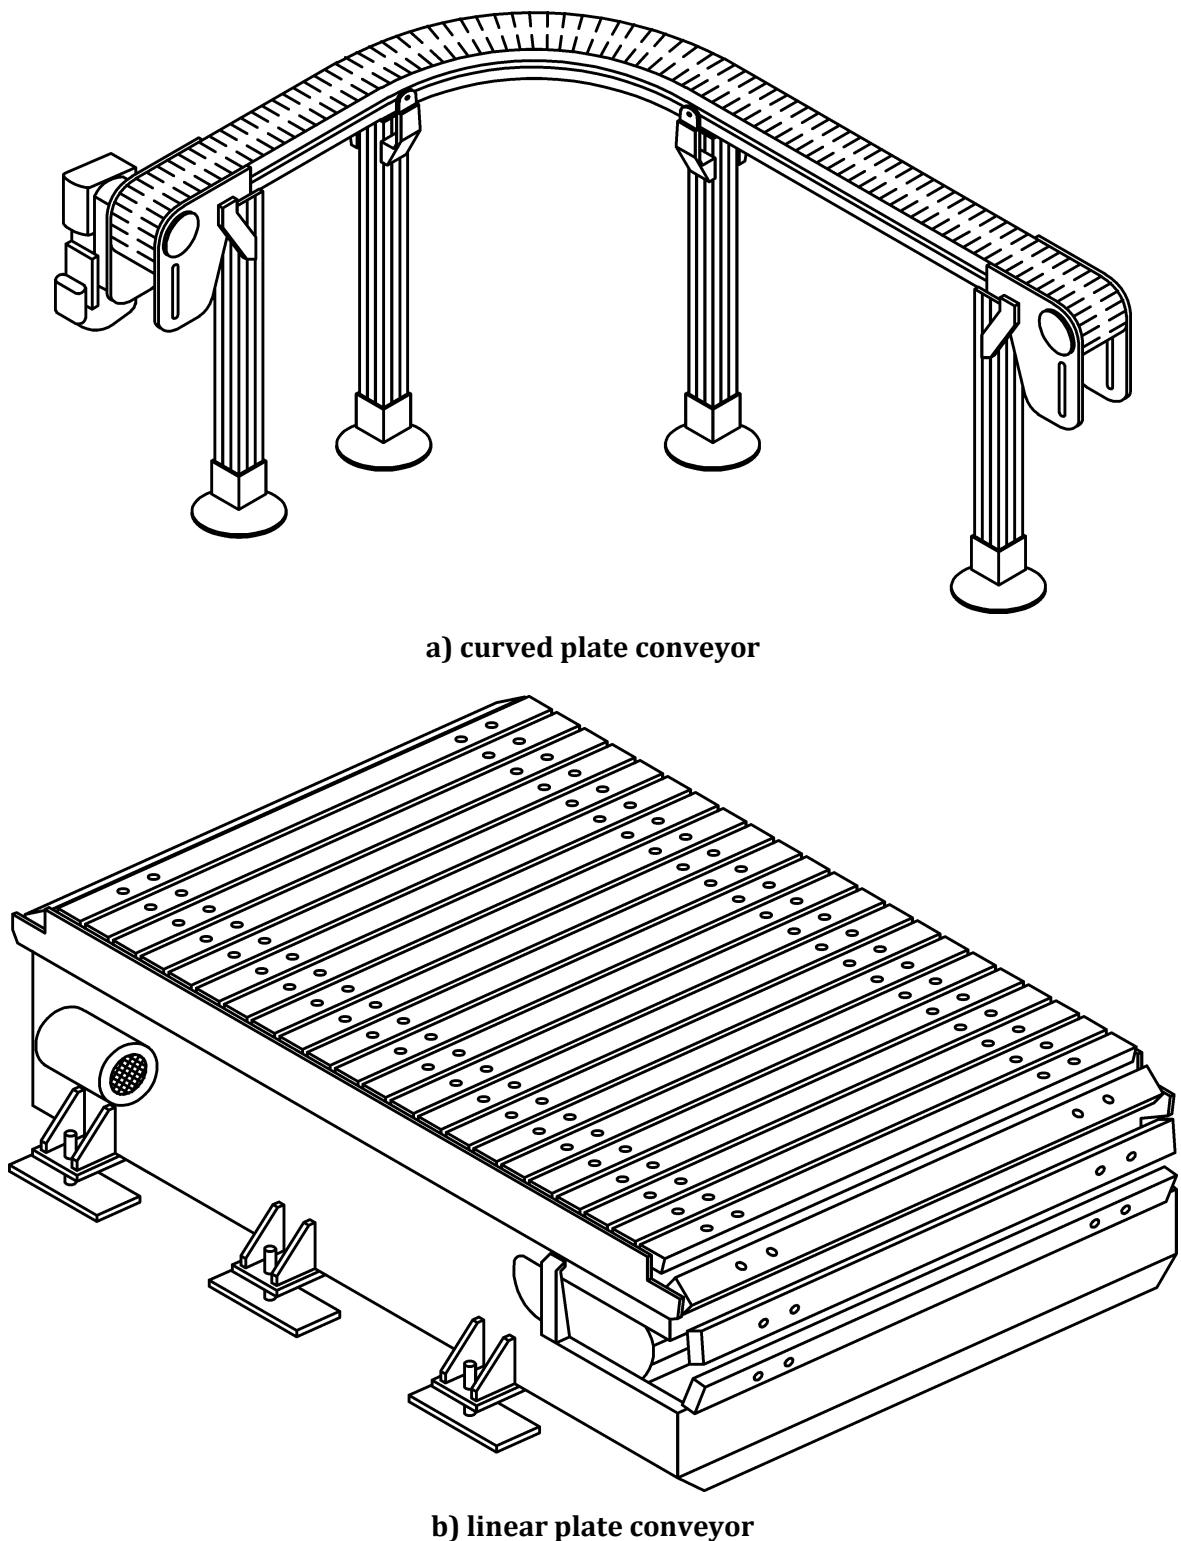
Plate conveyors (curved plate conveyor / linear plate conveyor)
